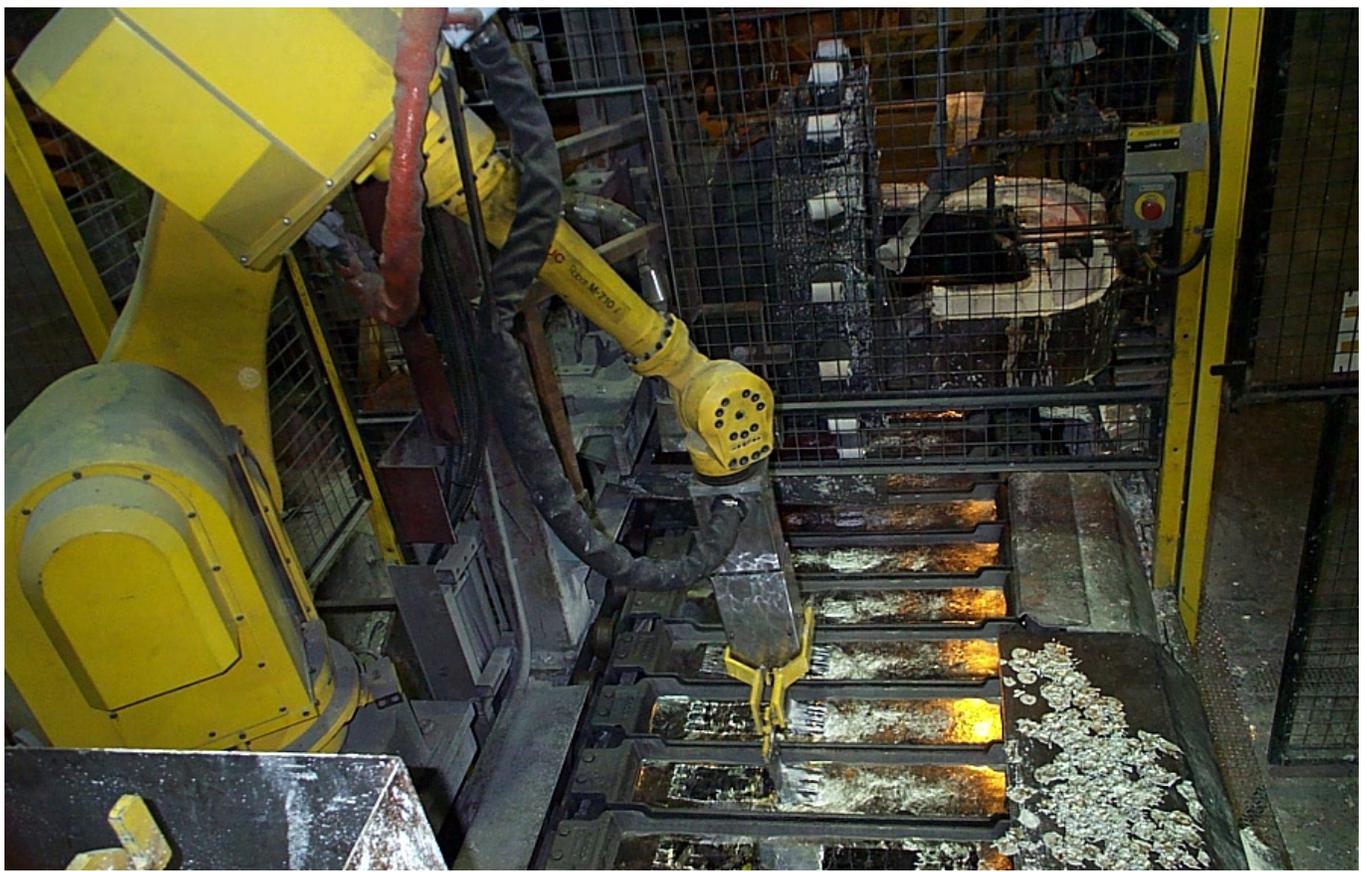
A Modern Pig Ingot Casting Machine with Skimming and Metal Filling Control
